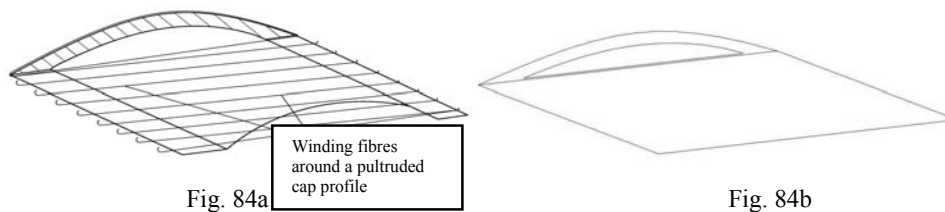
Cap cover part with cap reinforcement integrated in the manufacturing process a) Winding manufacturing process integrated in the cap cover part b) Pultruded manufacturing process integrated in the cap cover part.
